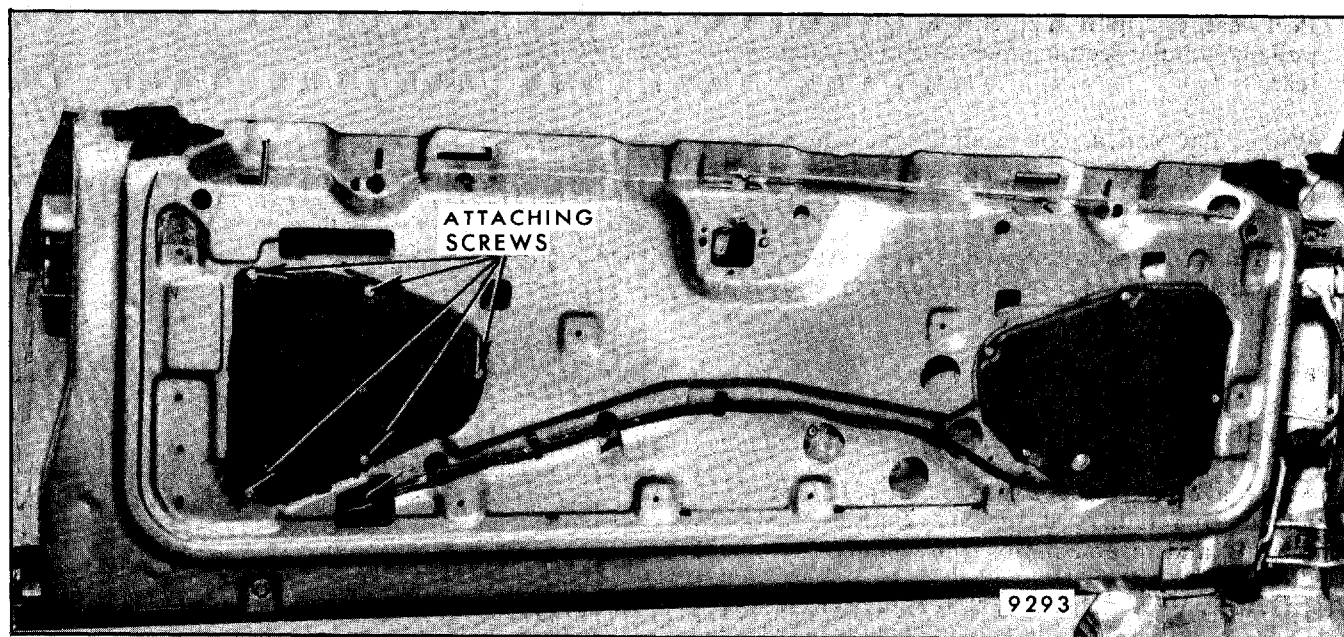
Tailgate Inner Panel Access Hole Covers
